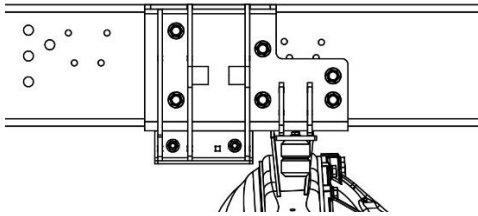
Passenger Side (RH) Upper Strut Mount Installation.
